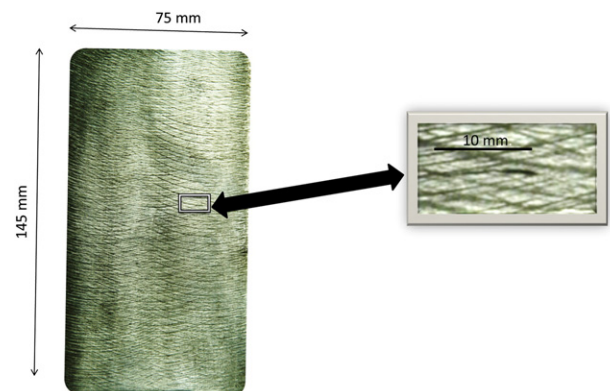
Image and dimensions of the second plaque tested, which presents a longitudinal crack, nearly visible thanks to the removal of the weld cap (detail in the right image).
